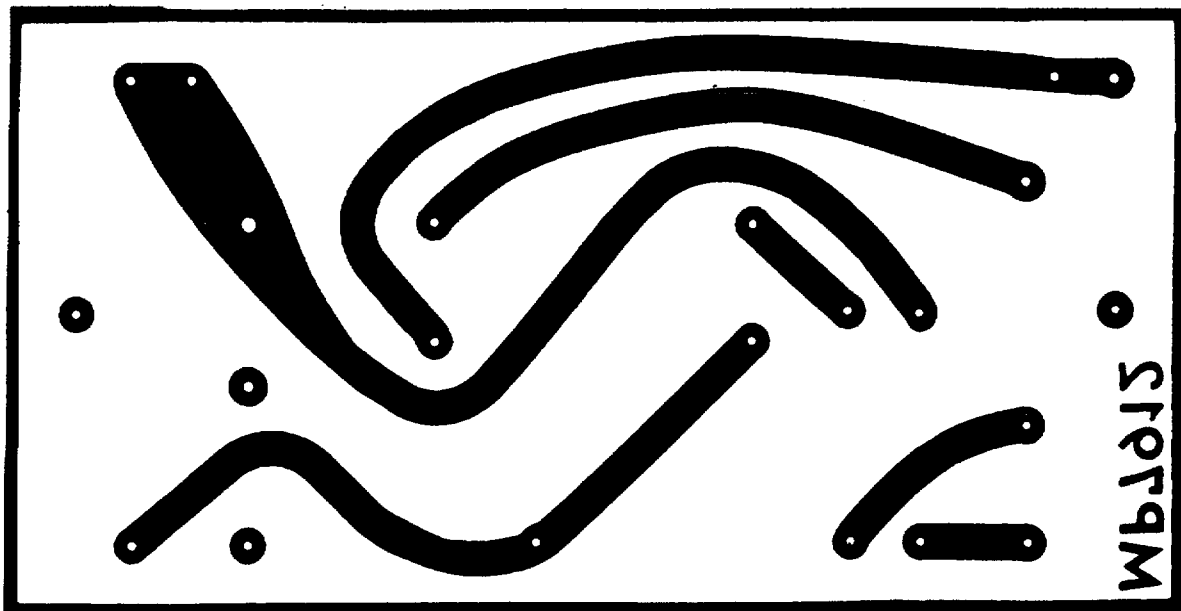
Component board assembly 3A9A33A1, parts location and printed wiring diagram.
